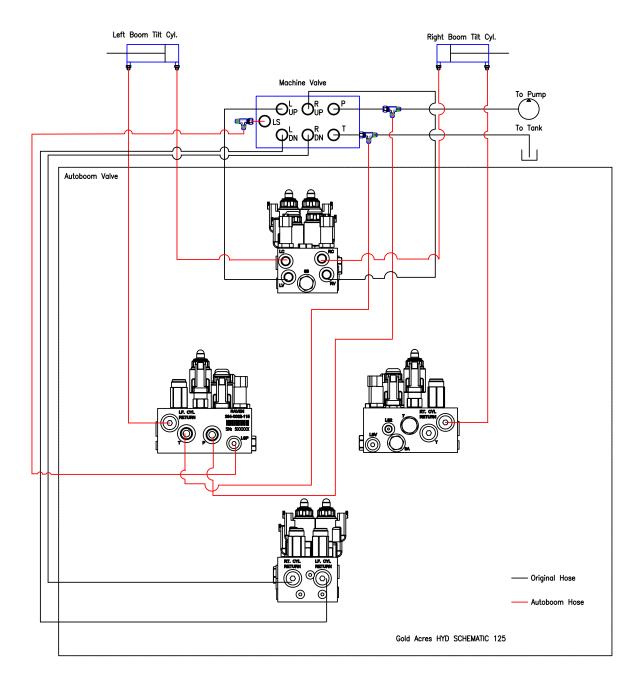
Load Sense Hose Installed on the Machine's Hydraulic Valve
